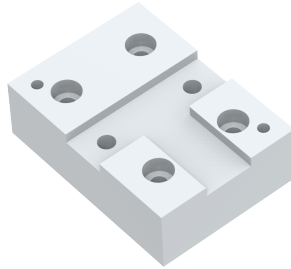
The spacer between the base plate and the bearing house on the motor side.
